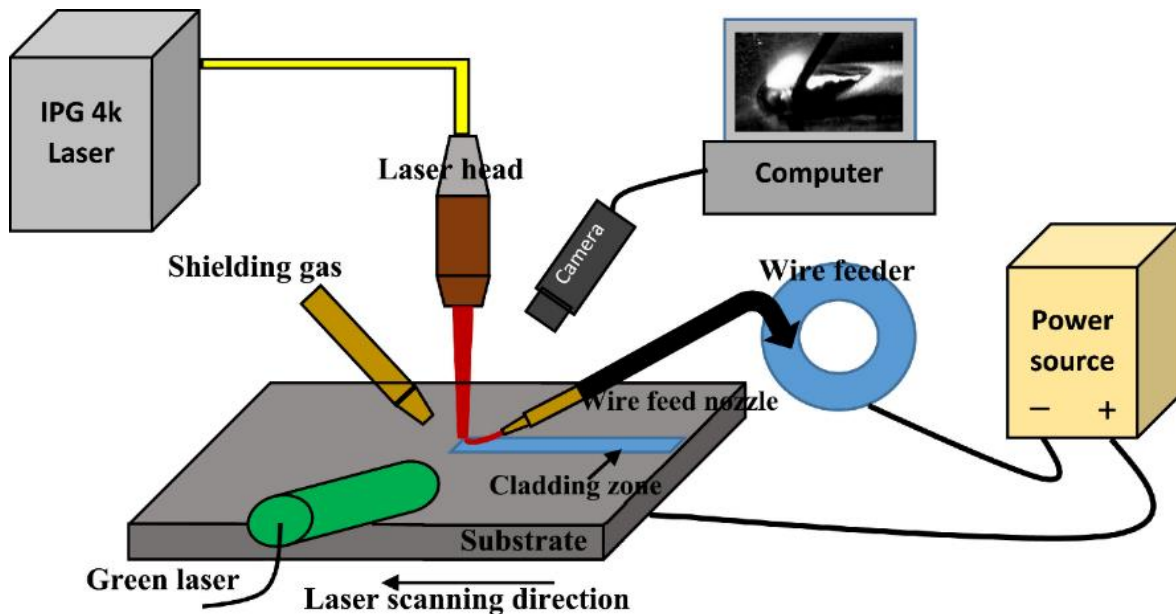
Experimental set-up for hot-wire laser welding. Reprinted with permission [76]. Copy right 2020,
